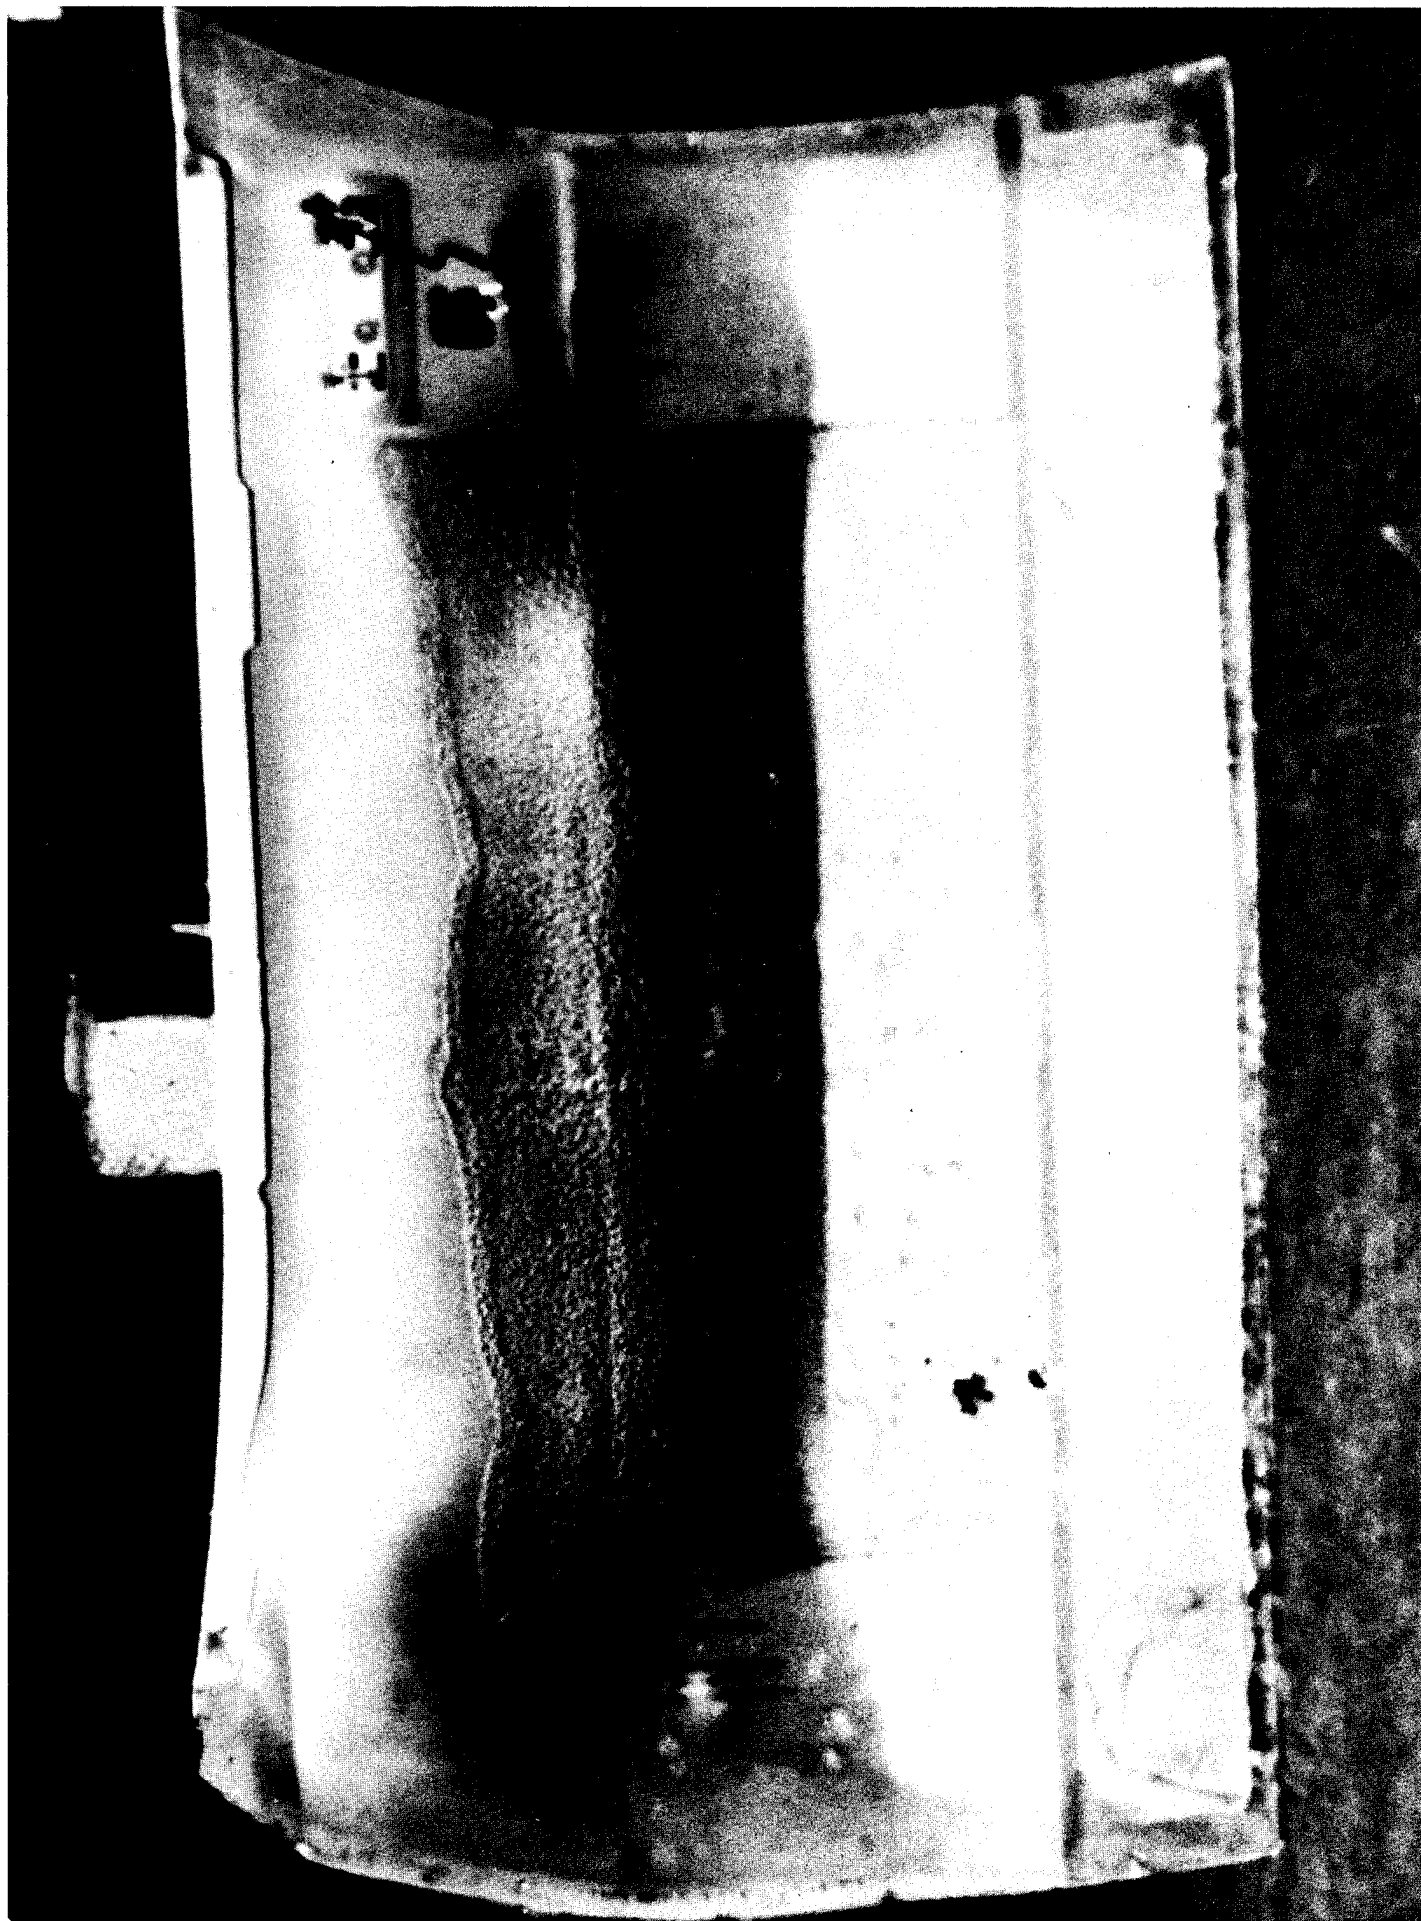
OUTER DOOR PANEL WITH DEADENING MATERIAL
